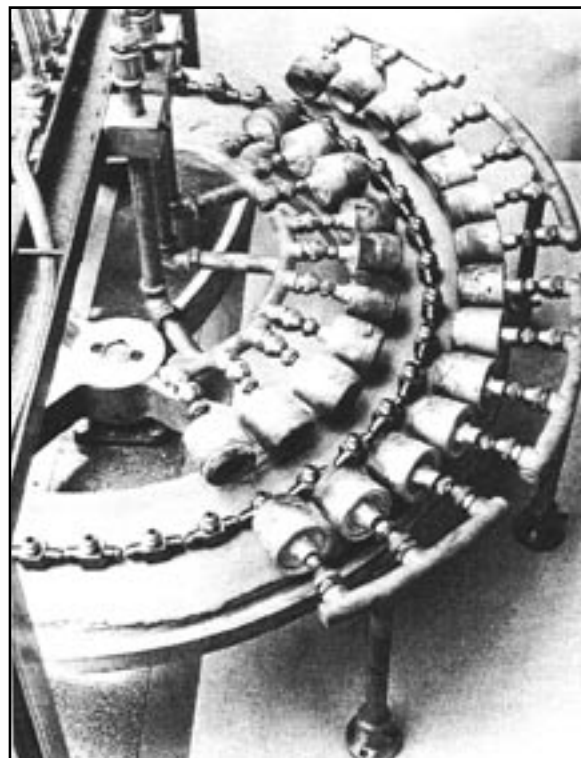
Rotary indexing table machine which brazes two mild steel tubes together at a rate of 360 an hour (Courtesy: Solbraze Ltd.)
